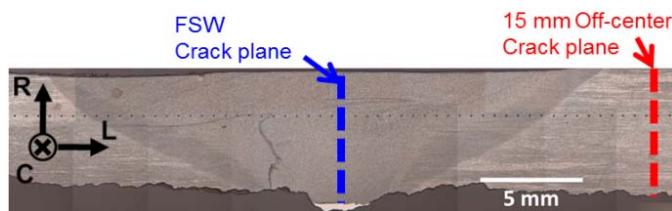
Optical image of friction stir welded region is shown with dashed lines representing the approximate location of specimen crack planes in the FSW and 15 mm off-center positions. Base metal samples were extracted more than 100 mm from the FSW.
